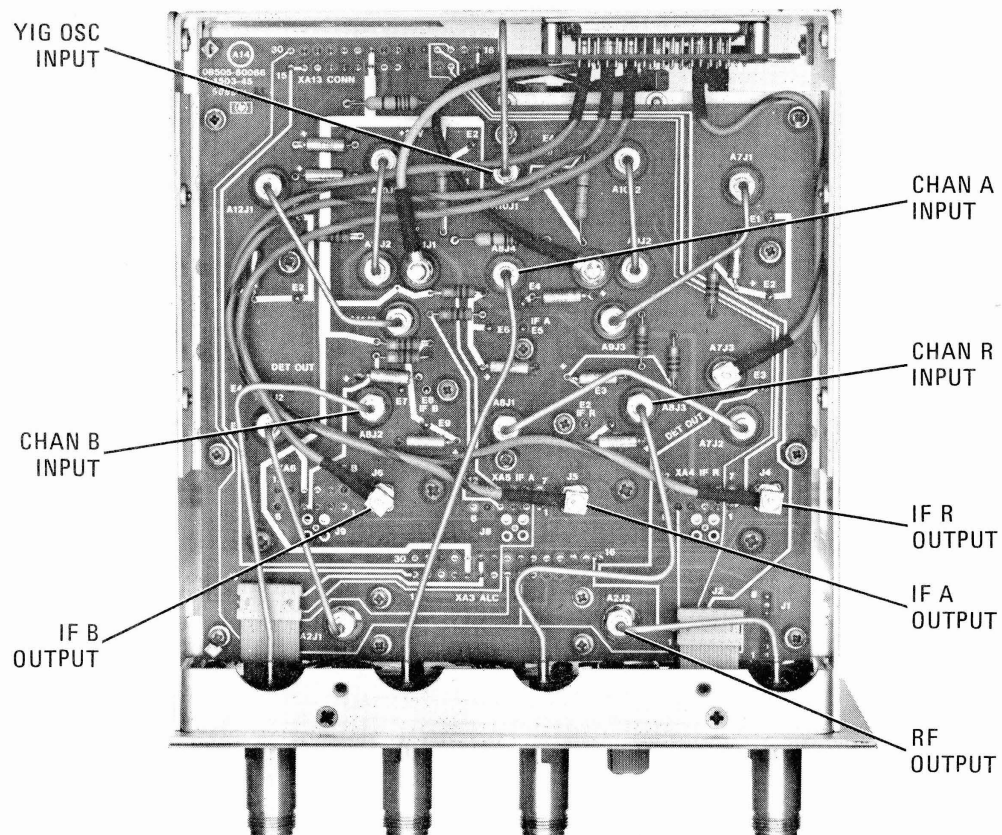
A1 Bottom View Showing Interface Connections to Mother Board
